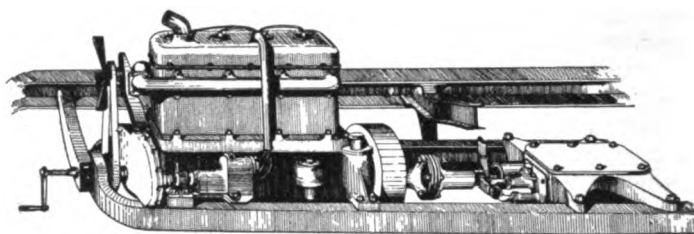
SUB-FRAME MOUNTING OF THE TYPE-J BUS
